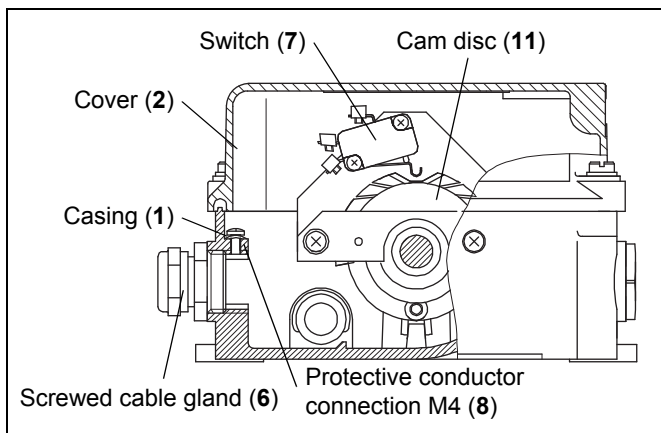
Removing the belt misalignment switch from the conveyor
